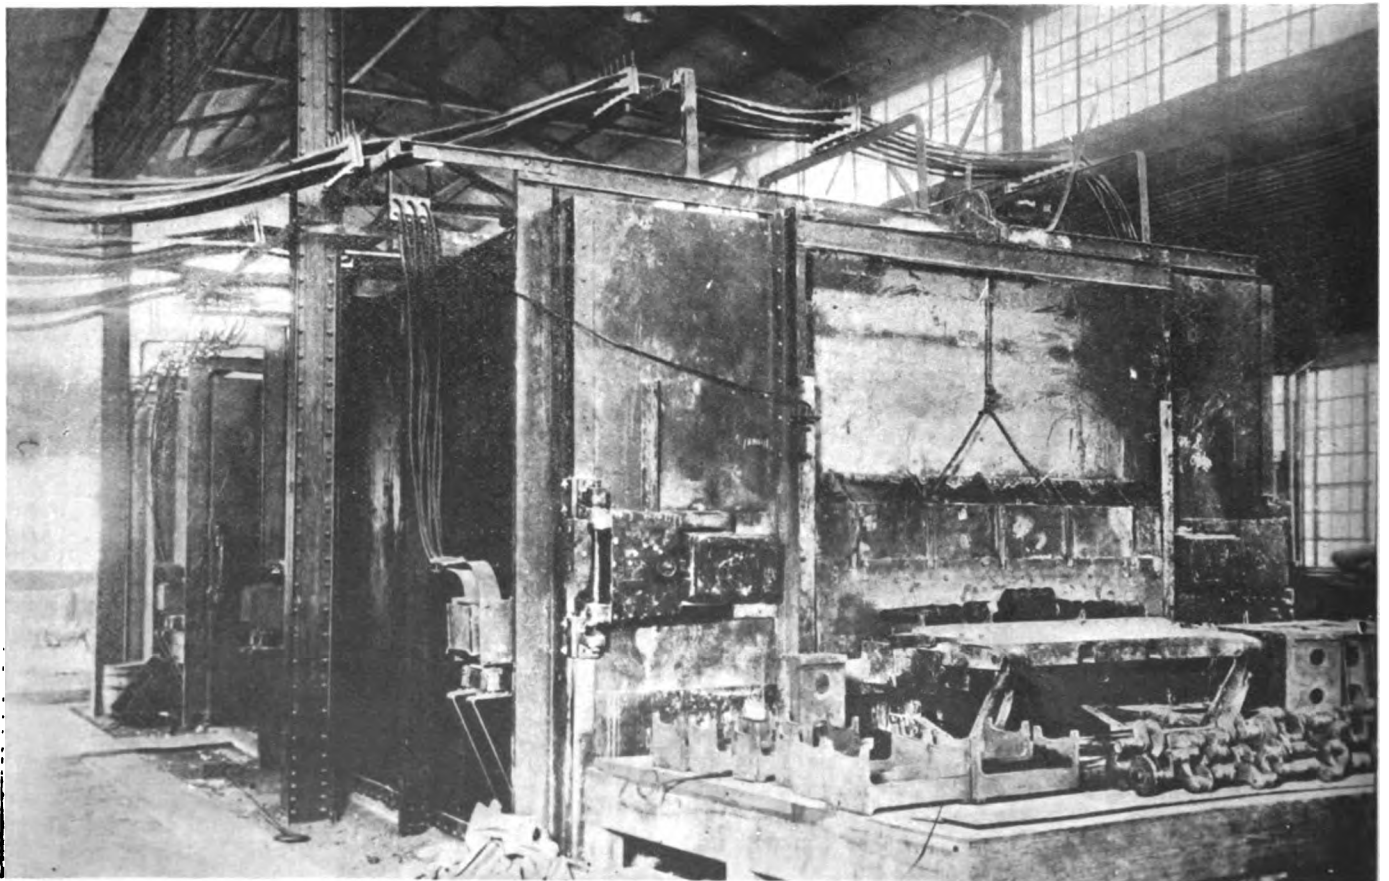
A 900-kw. electric furnace for heat treating crankshaft forgings. Operating at full capacity it will heat 3 tons to 1650° Fahr., and draw at 1000° Fahr. after quenching in one hour
